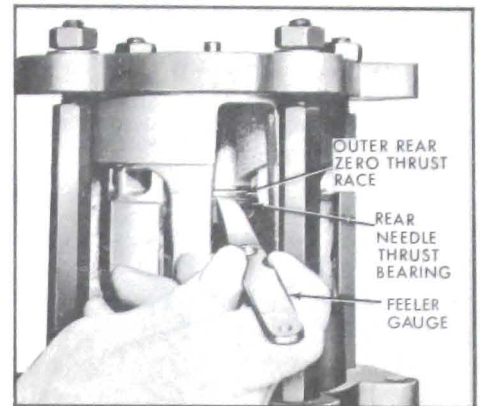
Gauging Clearance Between Rear Needle Thrust Bearing Rear Outer Race
